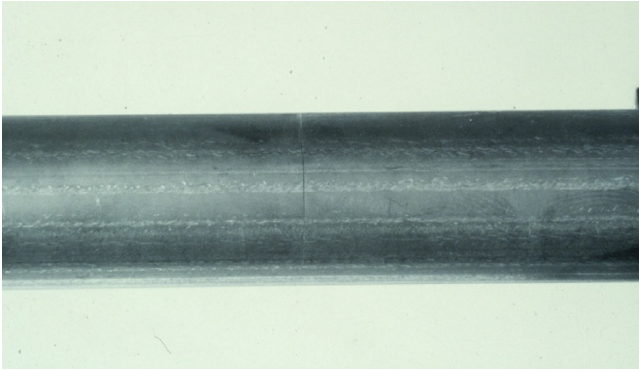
Fatigue Failure of a Titanium Tube in a Nuclear Power Plant Condenser (Pettigrew et al, 1991).
